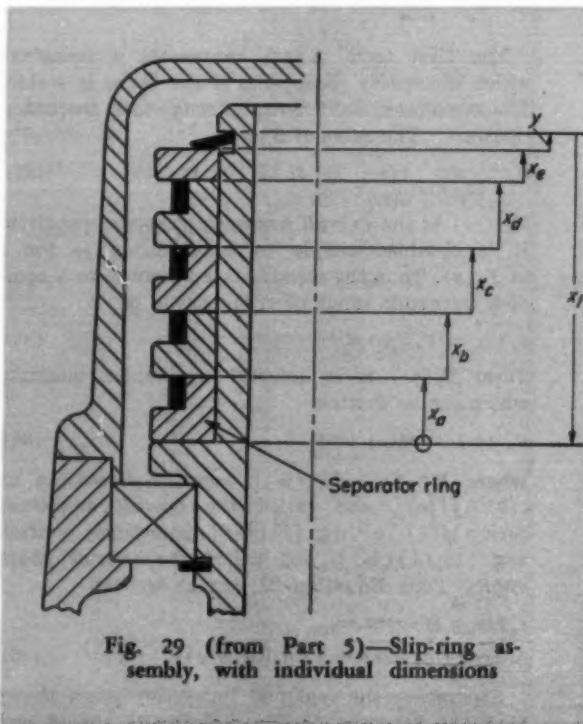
(from Part 5)—Slip-ring assembly, with individual dimensions
